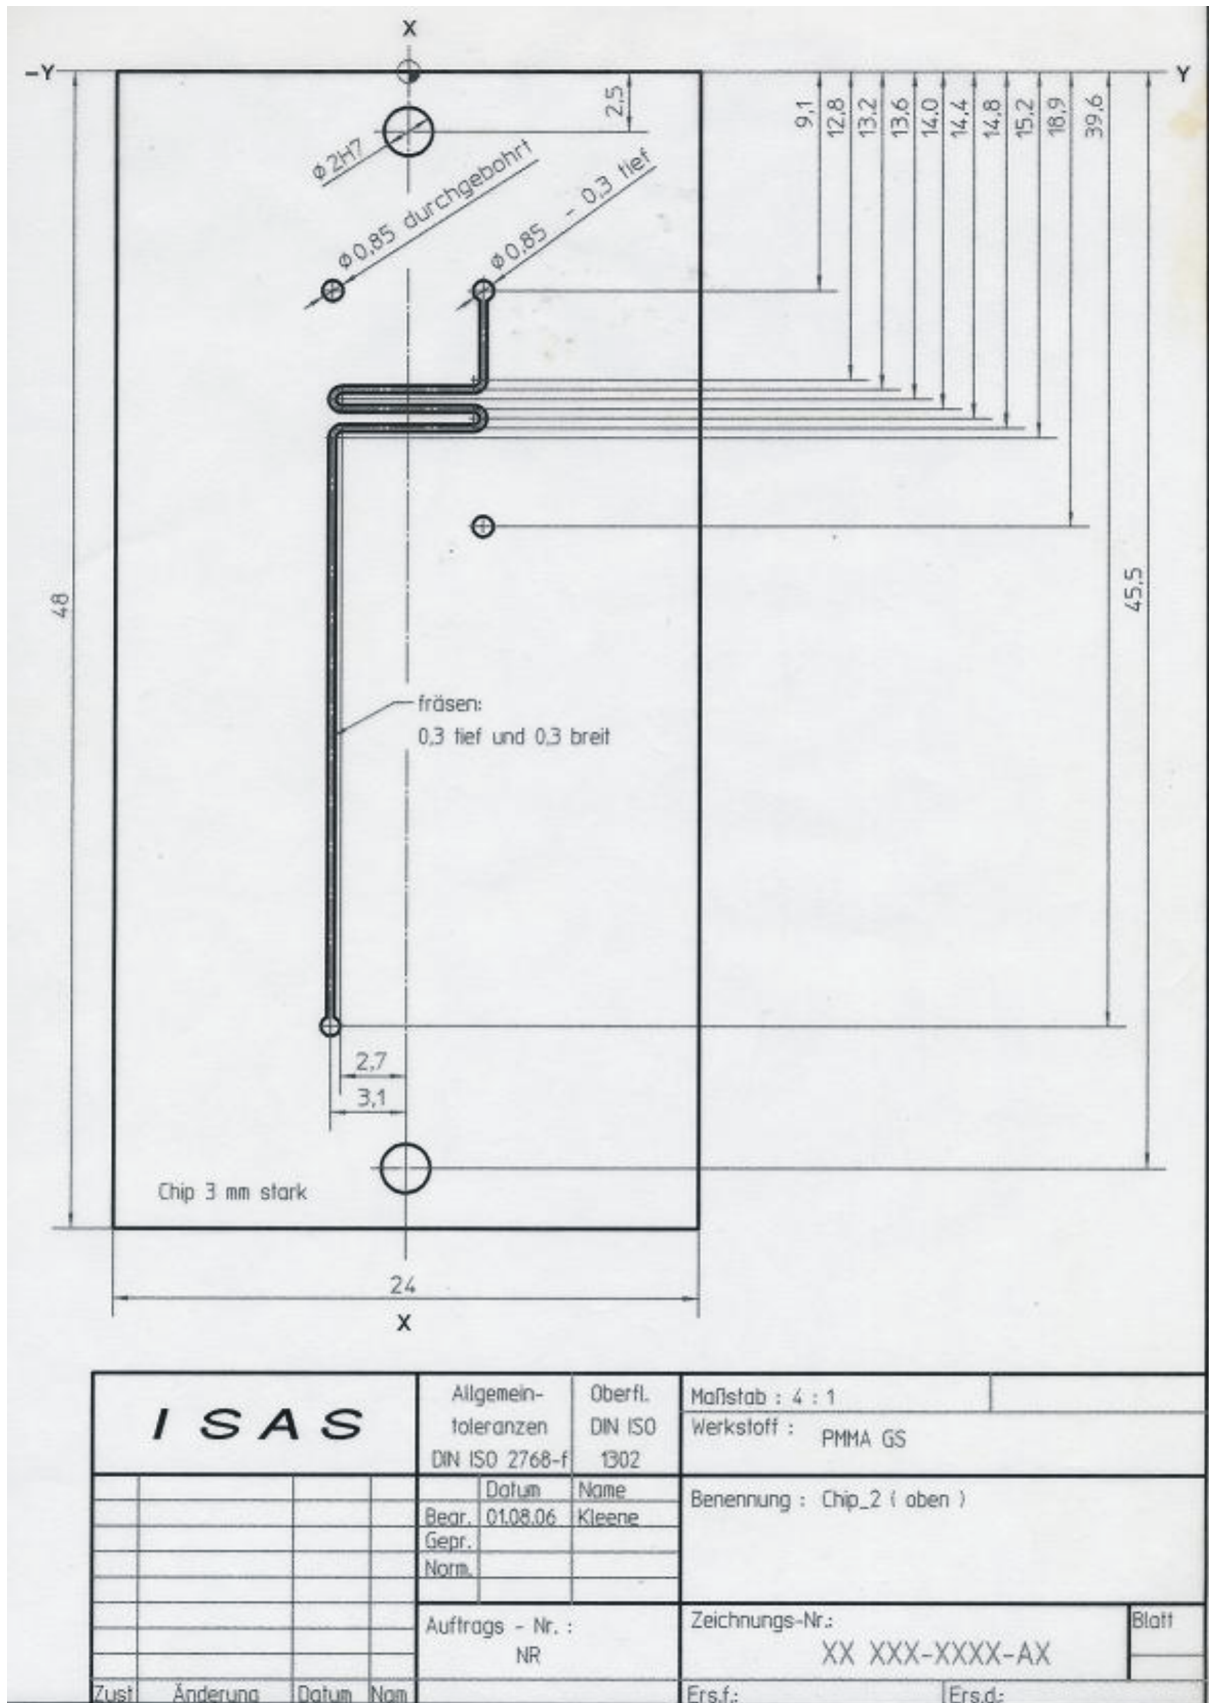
A drawing of a serpentine channel design on a PMMA layer.
